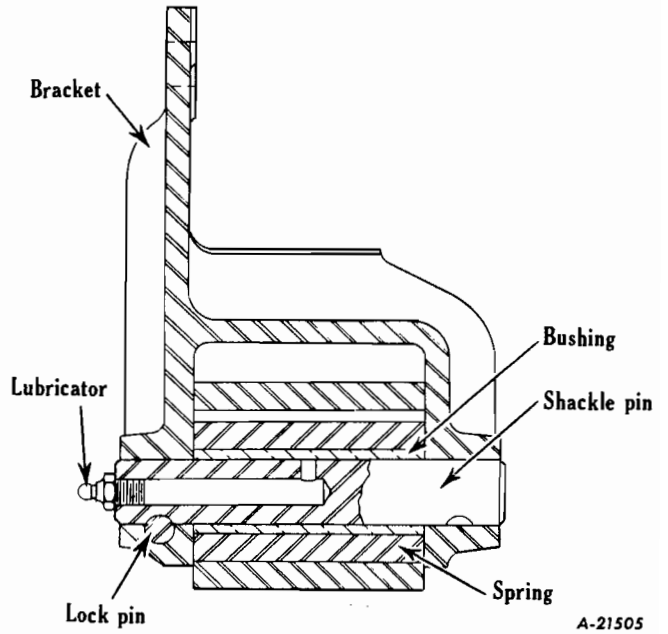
Front Spring Front Bracket For Models L-190, L-193, L-194, L-195, LF-190, L-200, L-204, L-205, L-210, LF-210.
